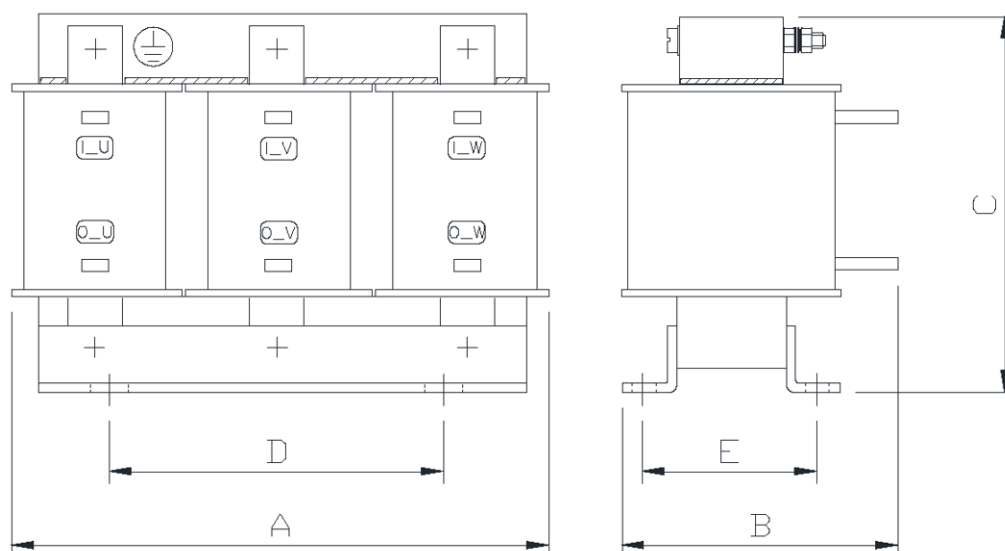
Dimensions [mm] of the choke module 13015600: free dimension tolerance DIN ISO 2768-c, bent across the direction of rolling
